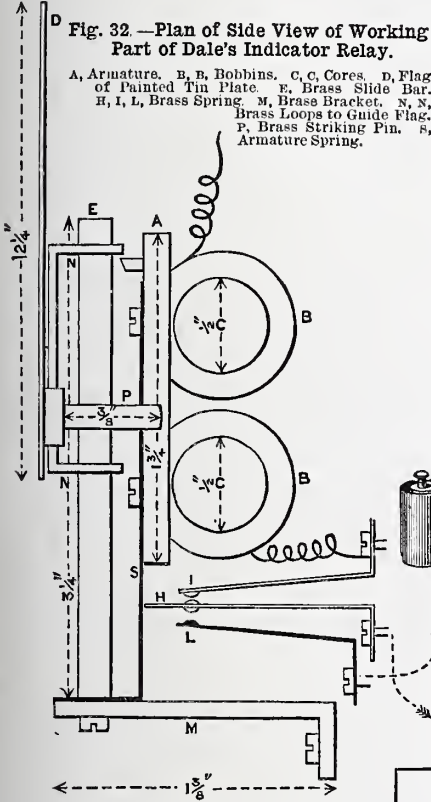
Plan of Side View of Working Part of Dale's Indicator Relay.
